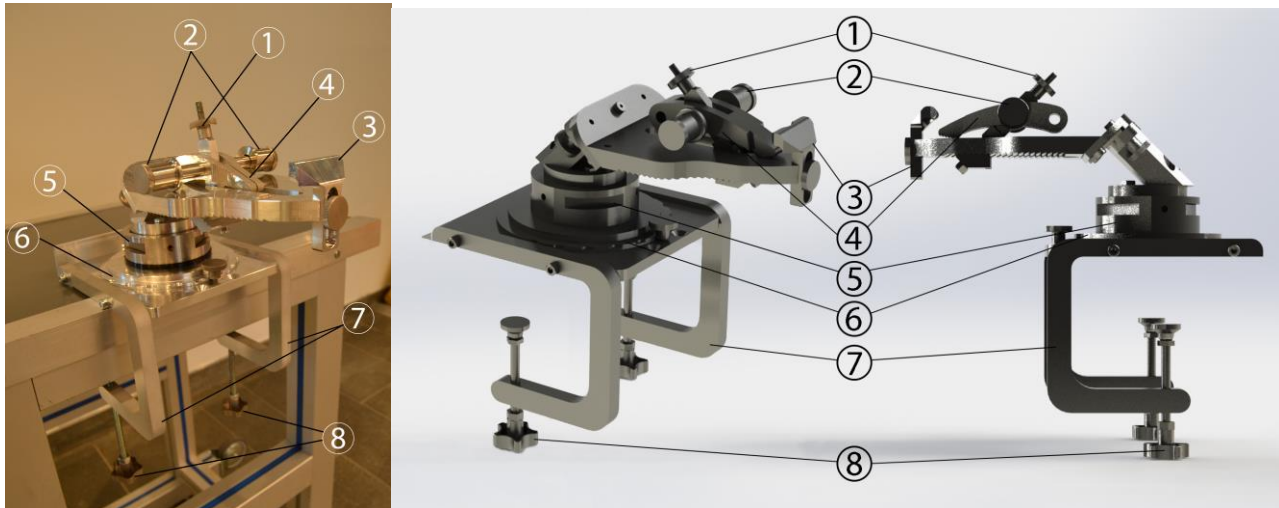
Jaw mount. (1) palatal mount clamping bolt, (2) axle boxes, (3) chin mount, (4) palatal mount, (5) six degrees-of-freedom force/torque sensor, (6) rotatable base (7) table mount claws, (8) table mount adjustment screws
